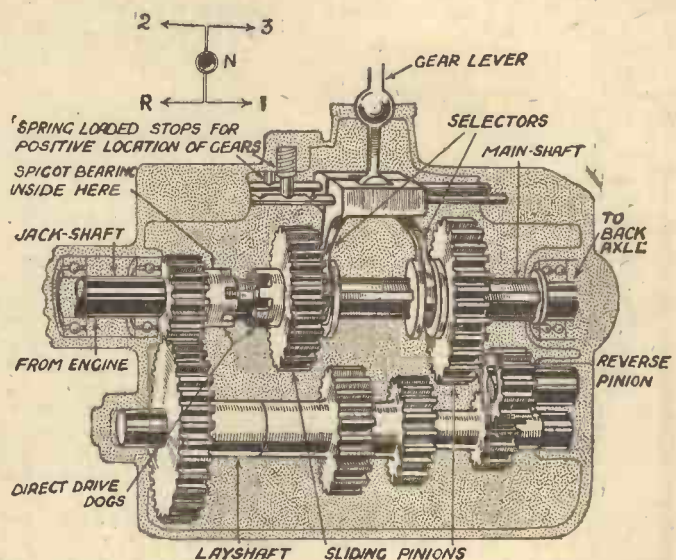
The principal parts of a three-speed gear box. The gears are shown in the neutral position. The jack shaft and main shaft are not one continuous shaft, but the end of the main shaft is free to revolve inside the jack shaft.
